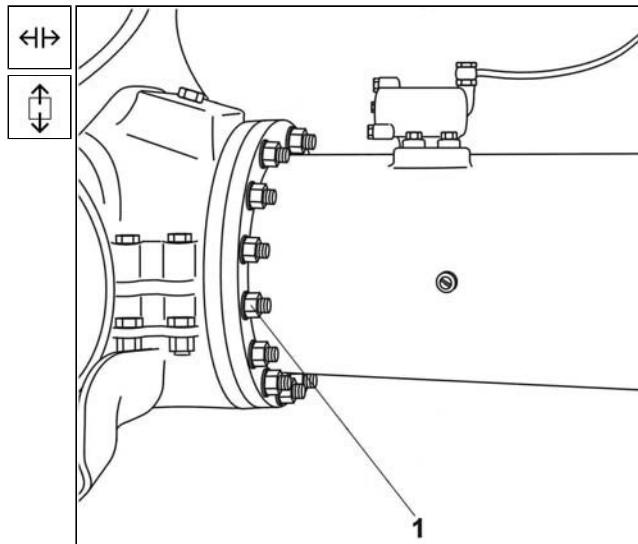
Connection of 2nd rear axle with connecting part - removal
